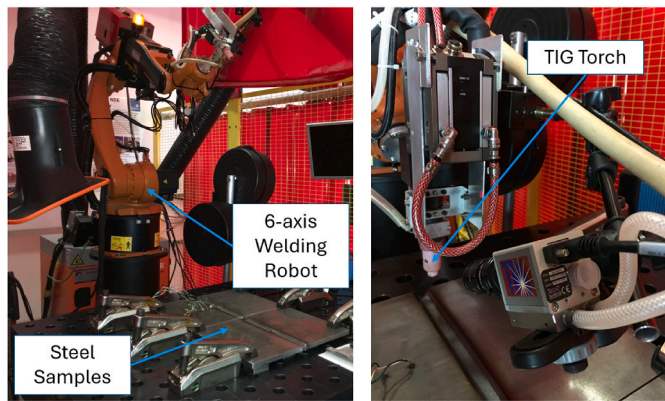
Setup for robotic manufacture of weld samples.
